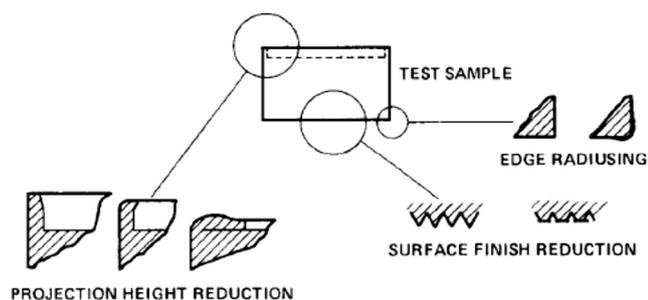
Projection height reduction, surface finish reduction, and edge radiusing in a workpiece [31]
